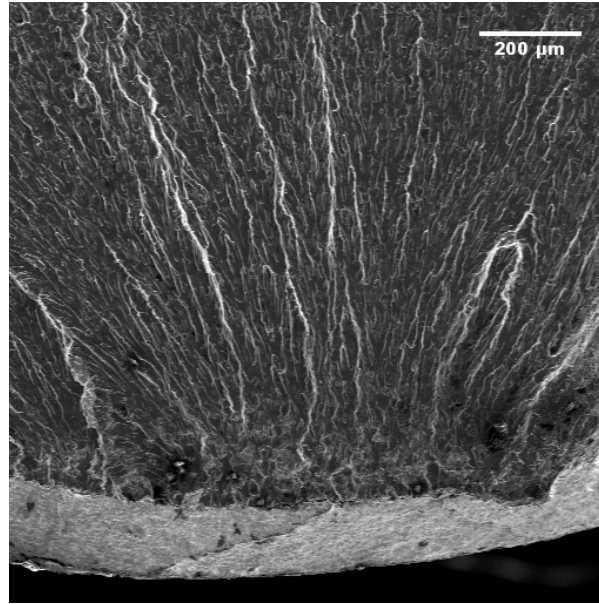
Fracture surface of axial fatigue specimen. Al 7050 T7451, shot peened and WC 17% Co coated by HVOF process.
